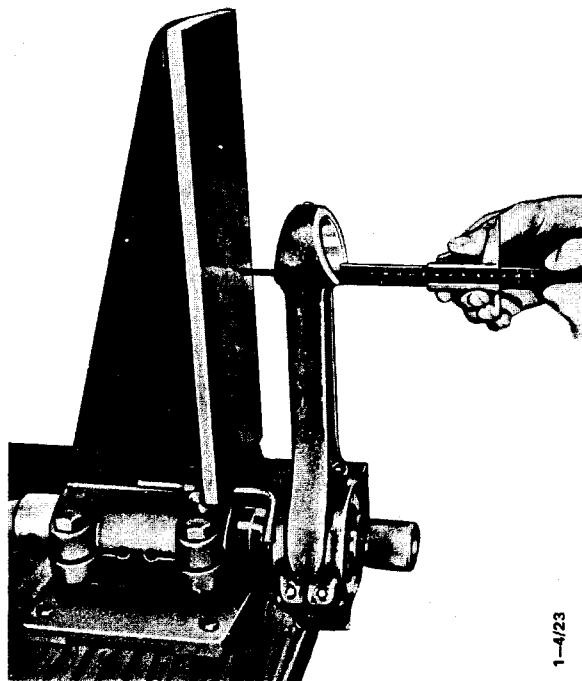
Check whether the connecting rod is bent into the shape of an S
